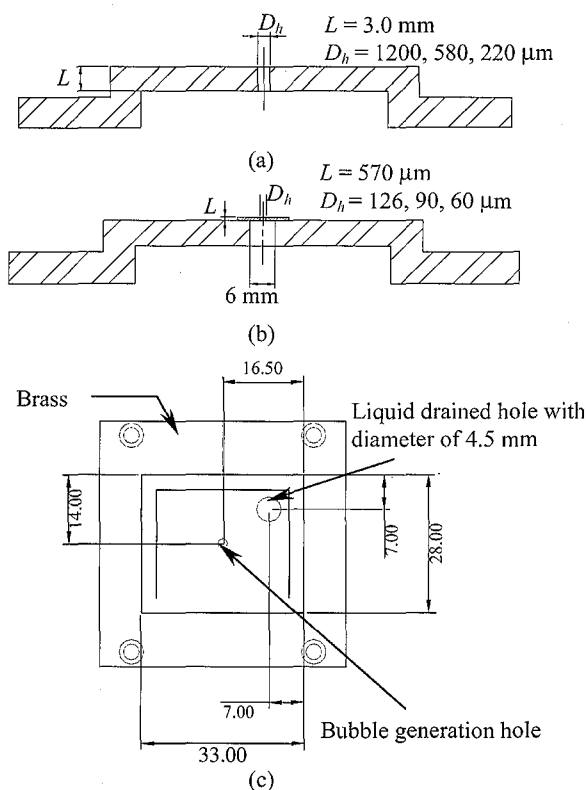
Schematic views of test plate, (a) a driller-drilled hole; (b) a laser-drilled hole; (c) top view of the bottom plate, unit: mm
